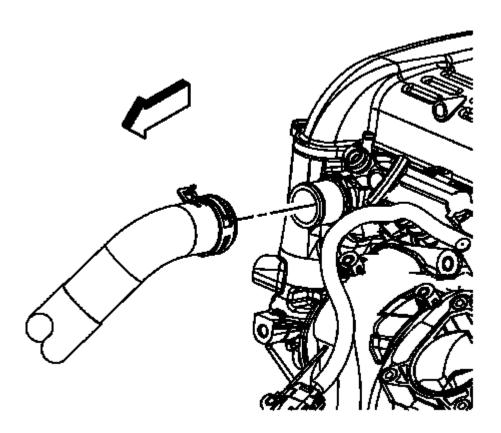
Coolant Recovery Inlet Hose And Clamp Courtesy of GENERAL MOTORS COMPANY
